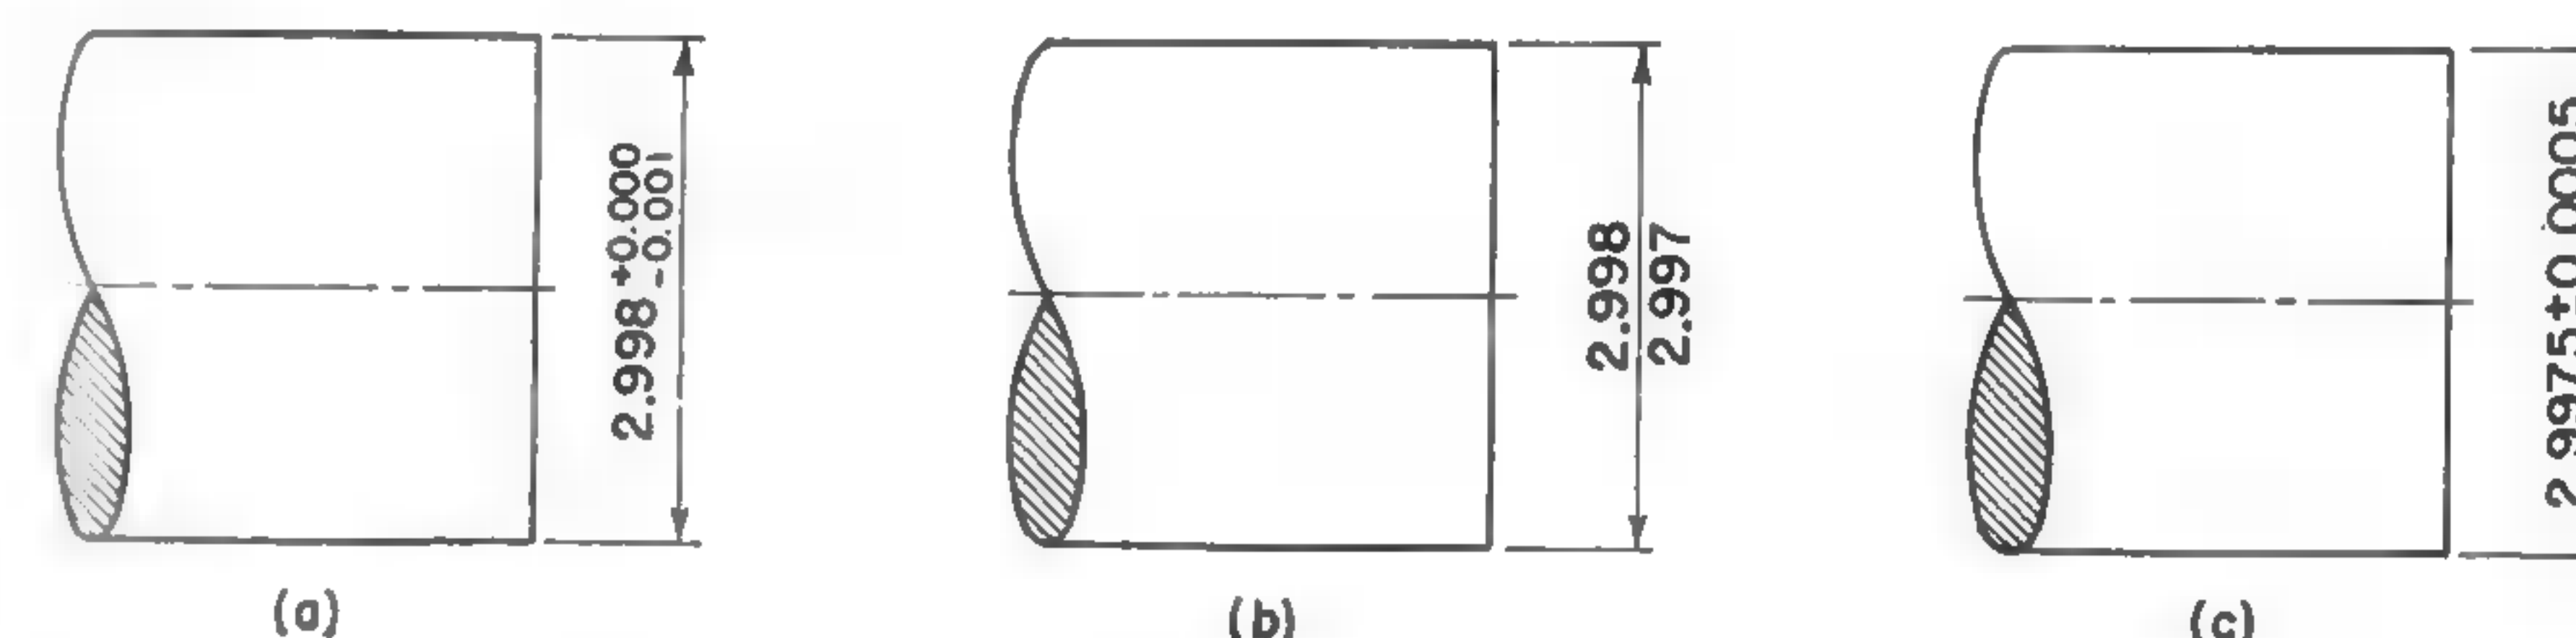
Methods of indicating tolerance for a shaft.
